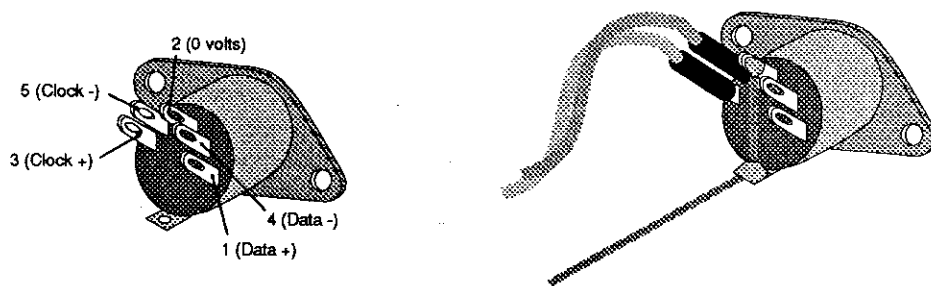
A solder type 5 pin DIN socket and facia panel
